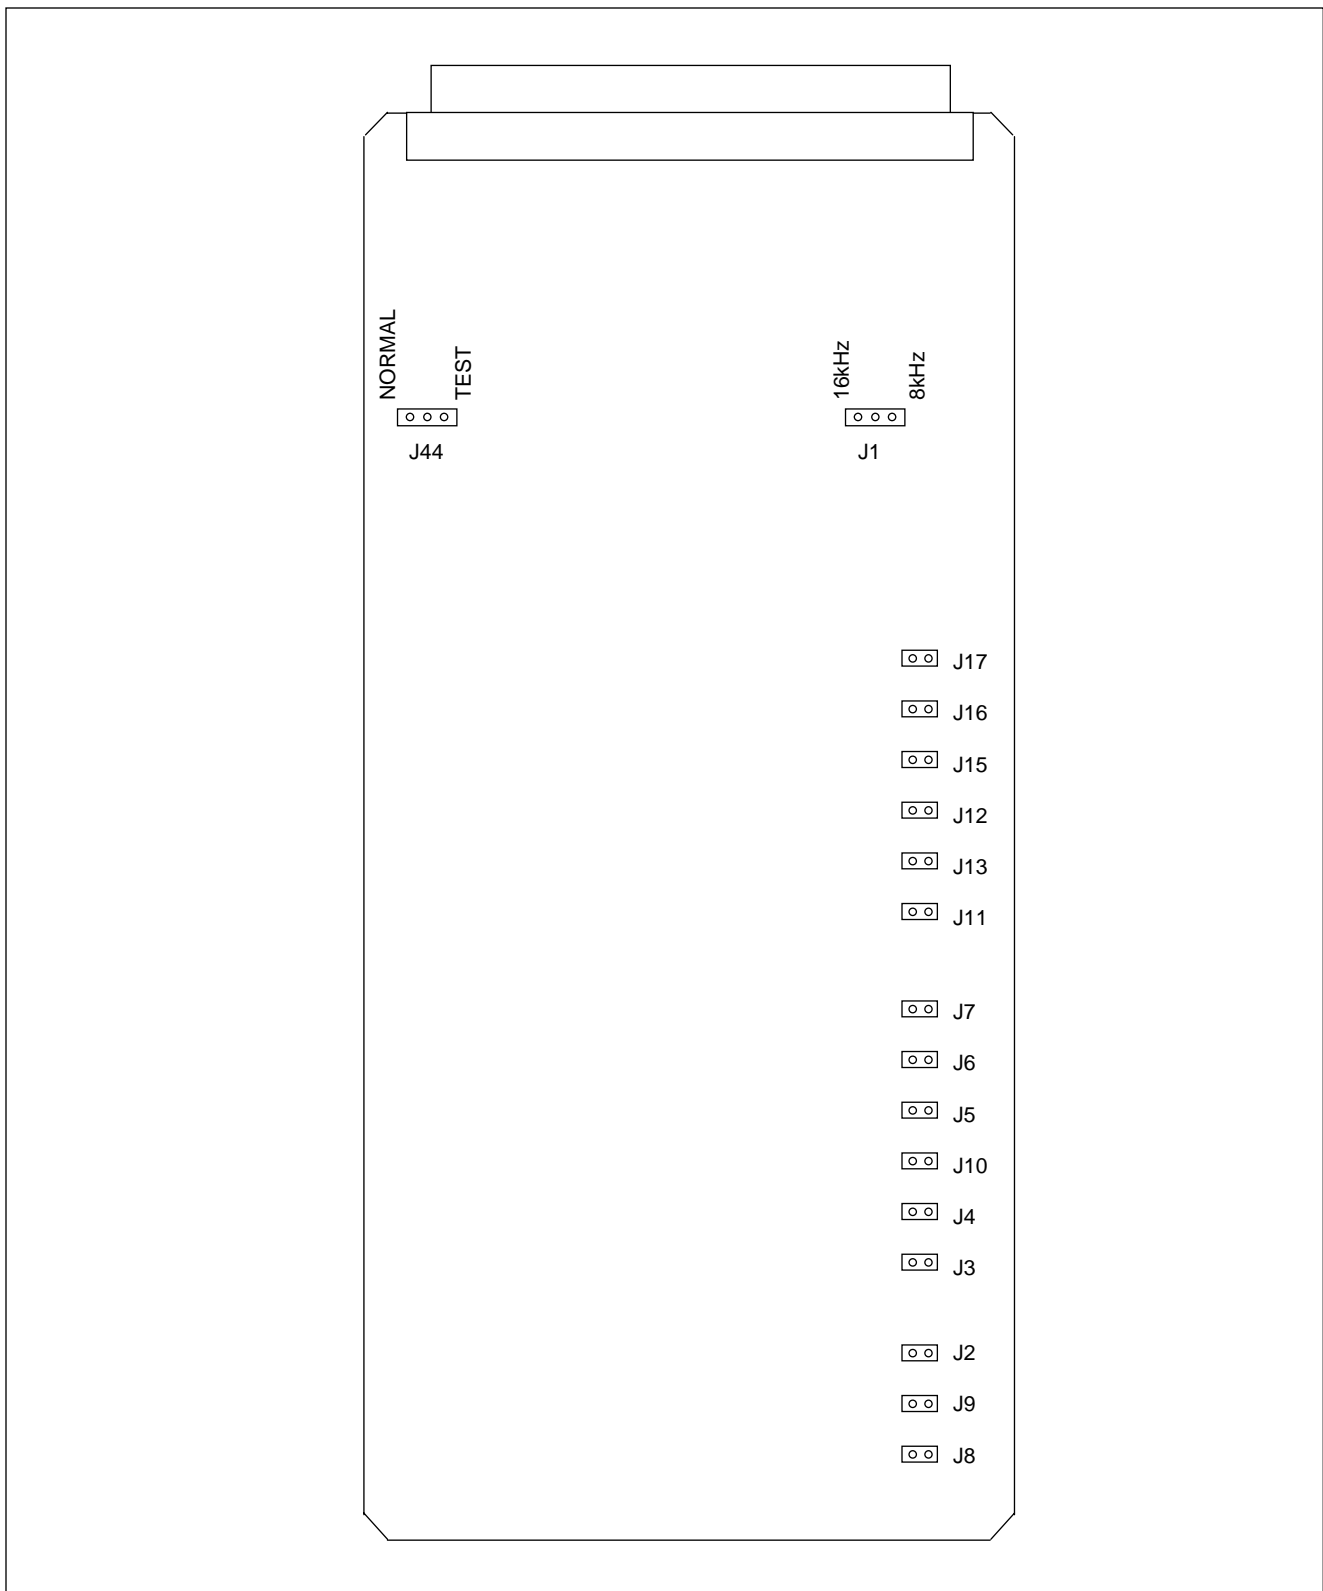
Location of jumpers on Tx Filter, PC Board 107828-1
